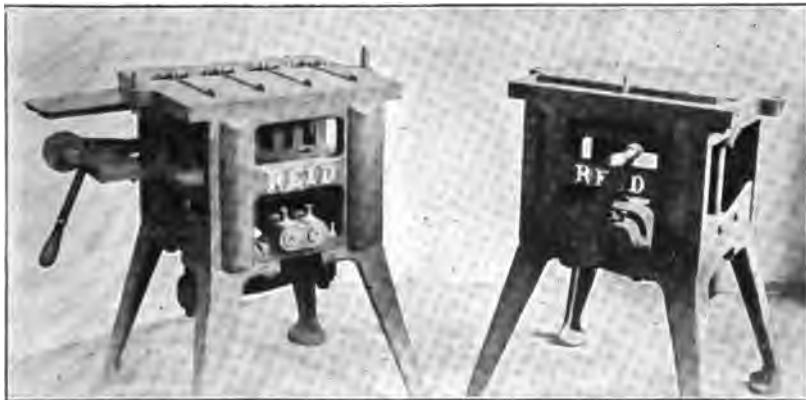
Same Machines as Fig. 342, with Patterns Drawn
